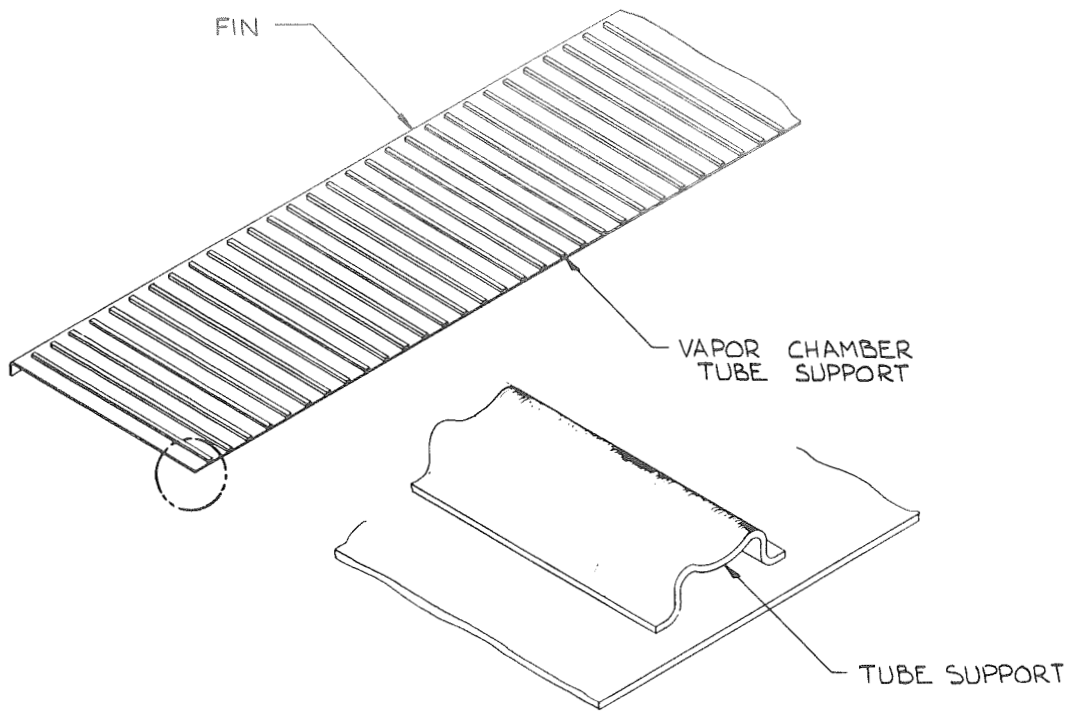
Vapor Chamber Fin Radiator Assembly Sequence Step 5
